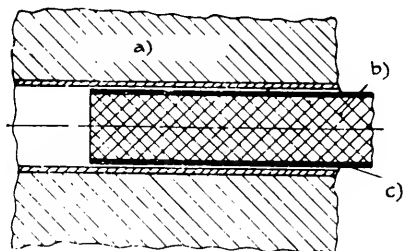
Design of Control Rod for a Fast-Neutron Reactor
